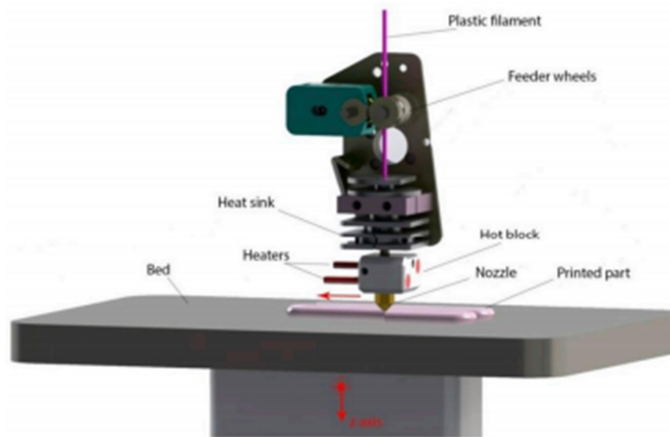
Schematic of FDM 3D printer used for parts made of CF [HEI19]
